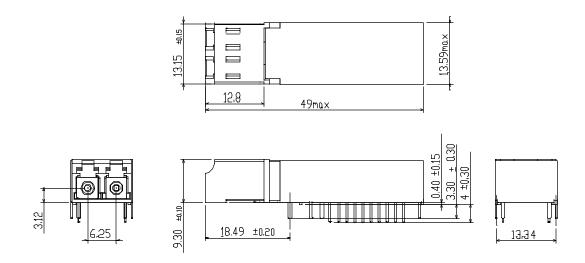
Outline Dimensions (SCM6008-GL-ZN)
